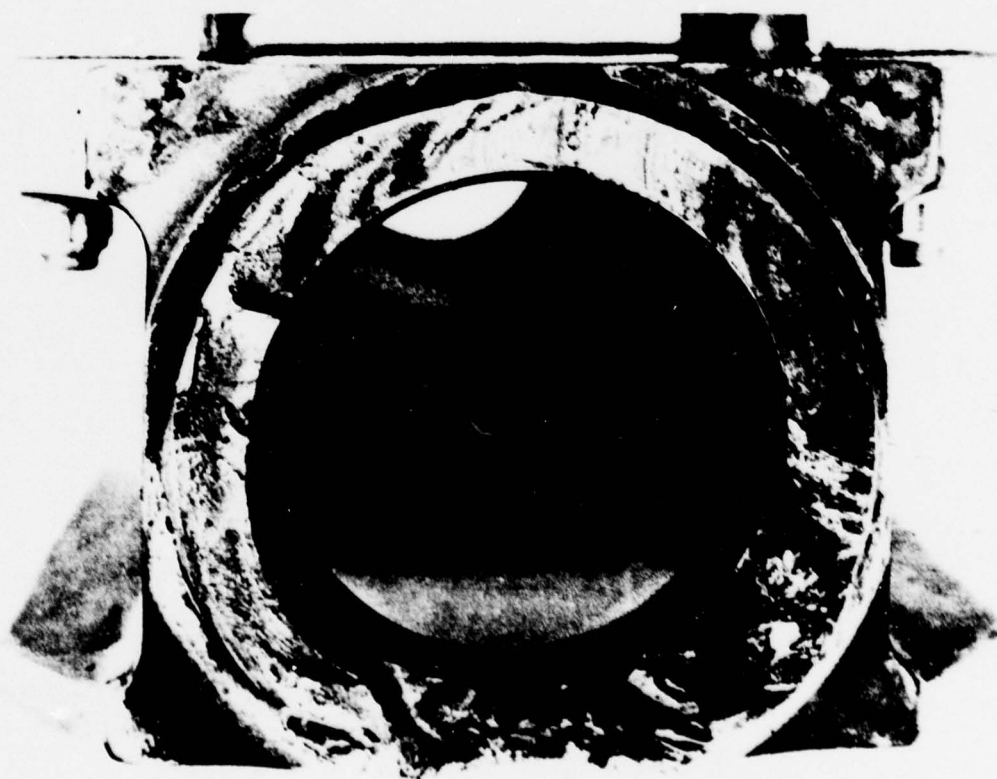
FRACTURE SURFACE, HELICOPTER MAIN ROTOR YOKE.
